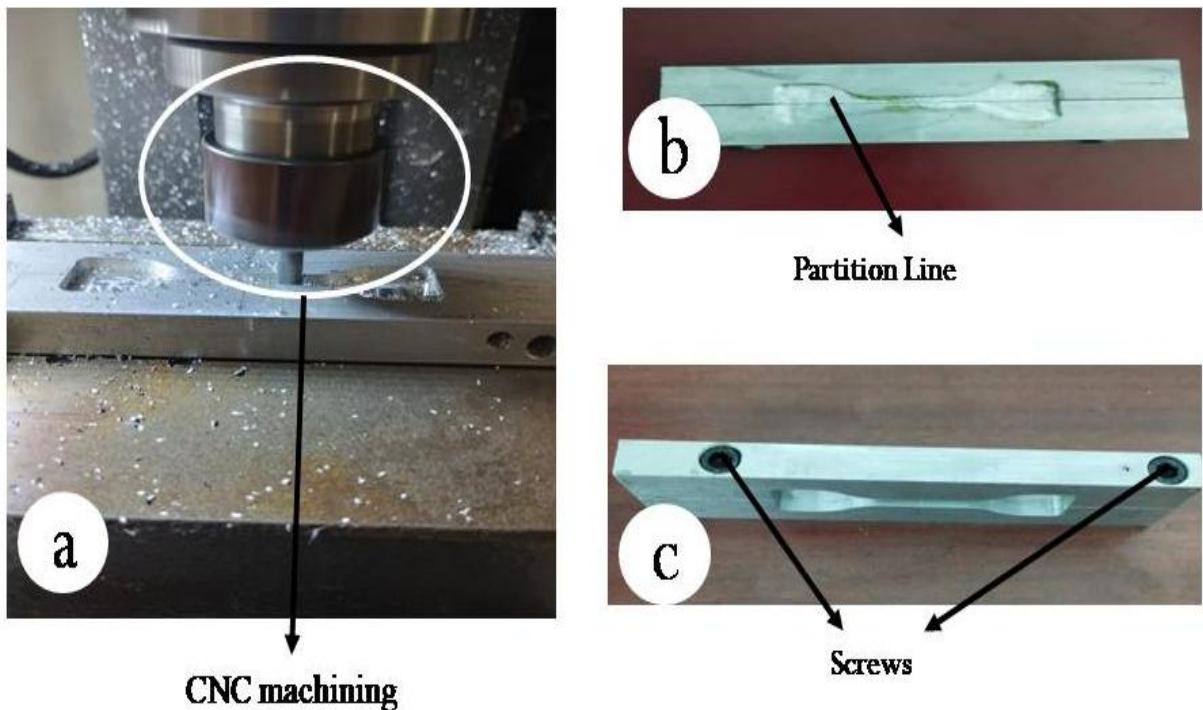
Split mold (a) cnc machining (b) front view of mold (c) top view of mold
